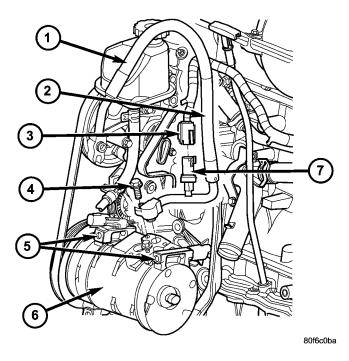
A/C Compressor Removal/Installation 2.4L Turbo
